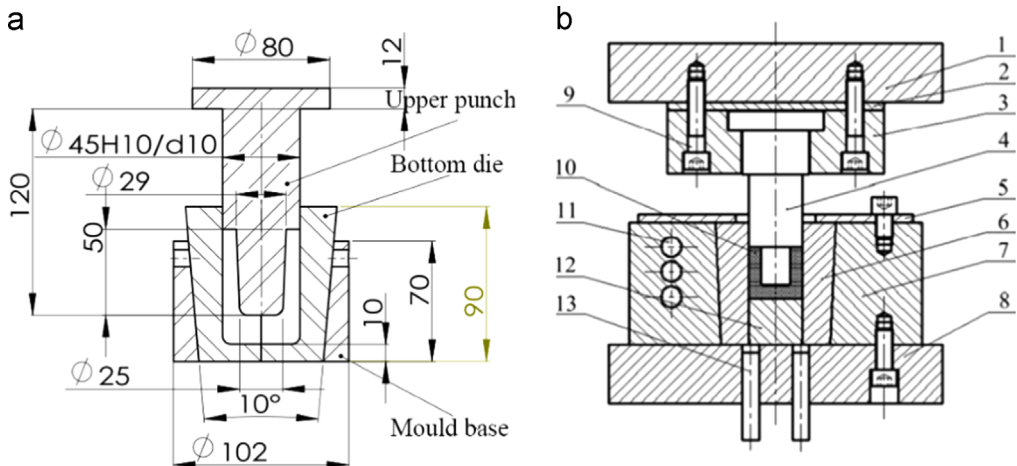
(a) Geometric model of the die; (b) Schematic diagram of die backward extrusion[17]; 1–Upper pattern plate; 2–Backing plate; 3–Mounting plate; 4–Upper punch; 5–Pressure back; 6–bottom die; 7–Die sleeve; 8–Down pattern plate; 9–Screw bolt; 10–Workpiece; 11–Resistance wire; 12–Mould core; 13–Ejector pin.
